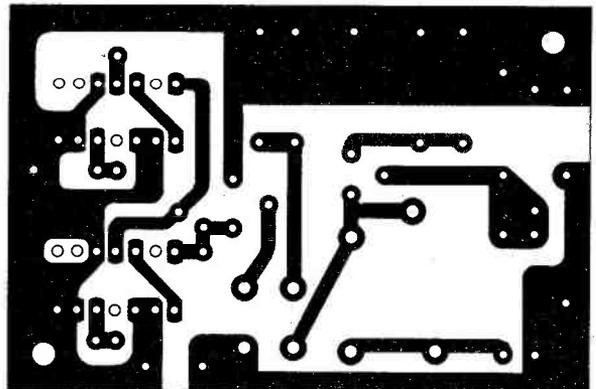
above, complete circuit diagram with details of coil. In Fig. 2, below, the PCB is shown full size together with component layout.
